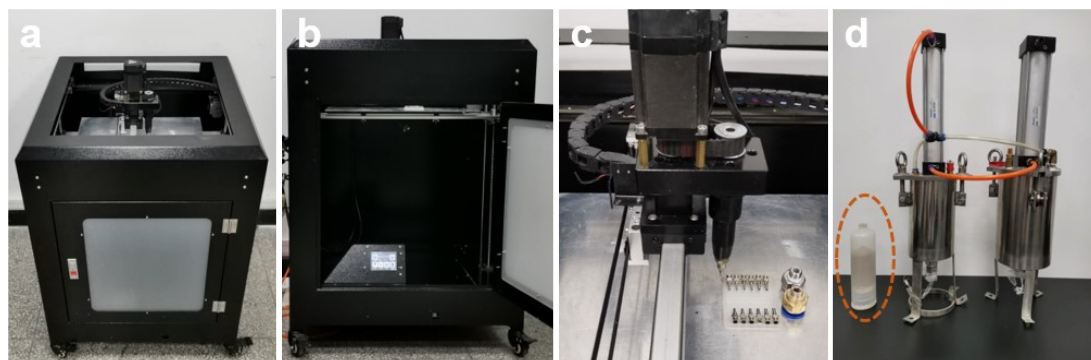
The optical photos of home-made screw extrusion printer for direct ink writing: (a) The top view of the extrusion printer, (b) the front view of the extrusion printer, (c) the print nozzle, (d) the cartridges with different print capacities.
